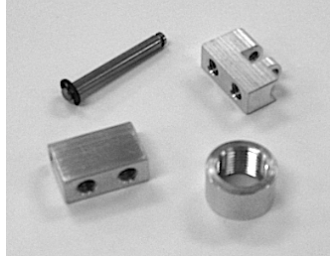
Photo of the four required machined parts for Adelopod construction. Shown are the arm mounting pins and hinges for the servo and linear actuation linkages along with the encoder adapter ring mentioned above in Section 4.1.2.
